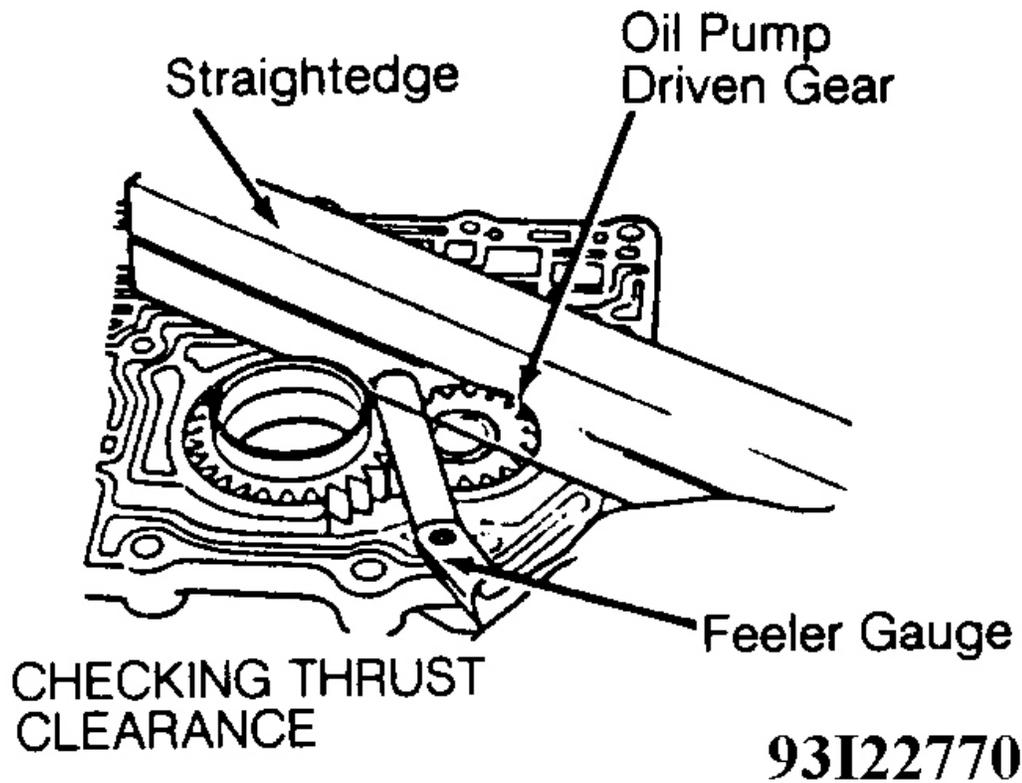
Measuring Oil Pump Clearances (1 of 2)
